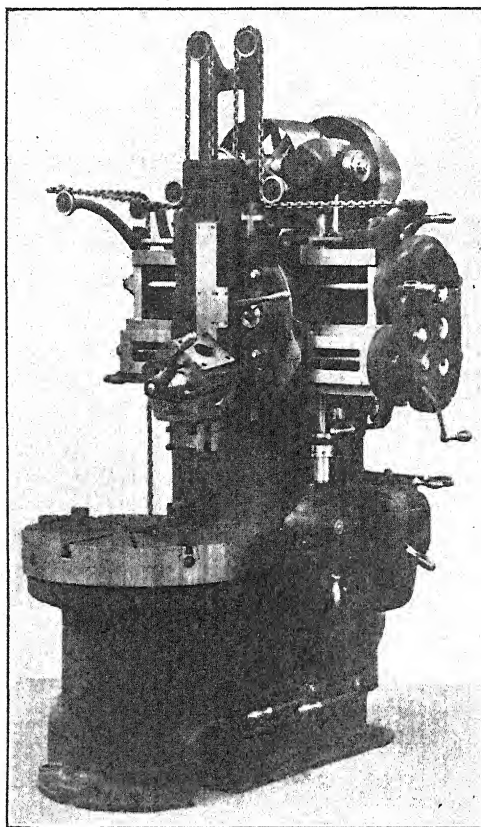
The King 30-In.-Swing Vertical Turret Lathe.
